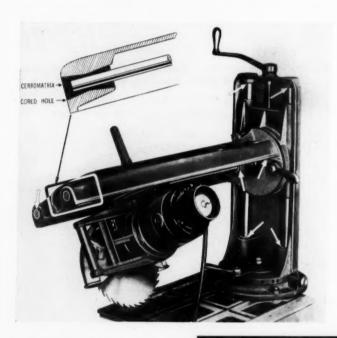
Above—By the use of "expanding metal", finished tubular parts can be anchored securely and accurately into cored holes in castings
